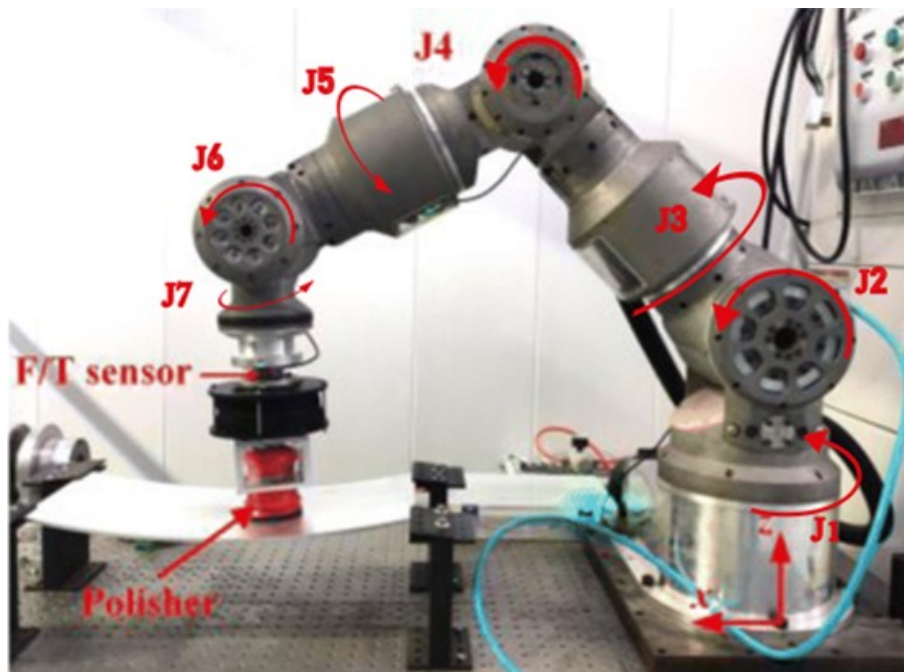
The dextrous collaborative arm (DCRA) and the robotic polishing system, with each of the seven joints, are equipped with the joint torque sensors [30].
